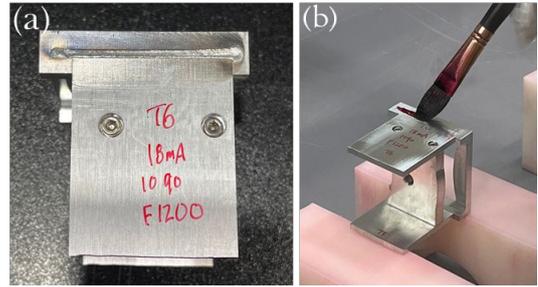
(a) Welded test specimen and (b) Liquid penetration test for welded test specimen
